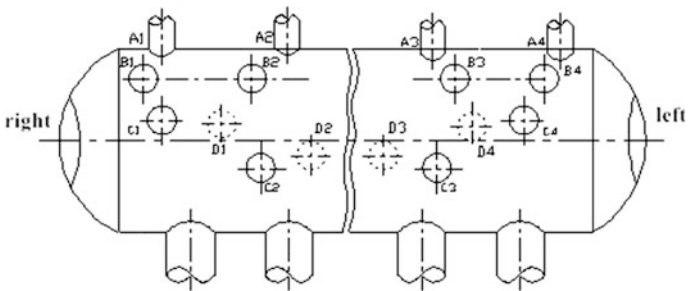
Distribution of the rear nozzle of the 1# boiler barrel. Note: *A1, A2, A3, A4* are respectively the 1, 2, 7 and 8 fillet welds of saturated steam outlet tube seat from the rear right; *B1, B2, B3, B4* are respectively 1, 2, 11, 12 fillet welds of water inlet tube seat from the drum rear right; *C1, C2, C3, C4* are respectively 1, 2, 19, 20 fillet welds of increasing tube seat from the drum rear left; *D1, D2, D3, D4* are respectively 1, 2, 13, 14 fillet welds of increasing tube seat from the drum front right
